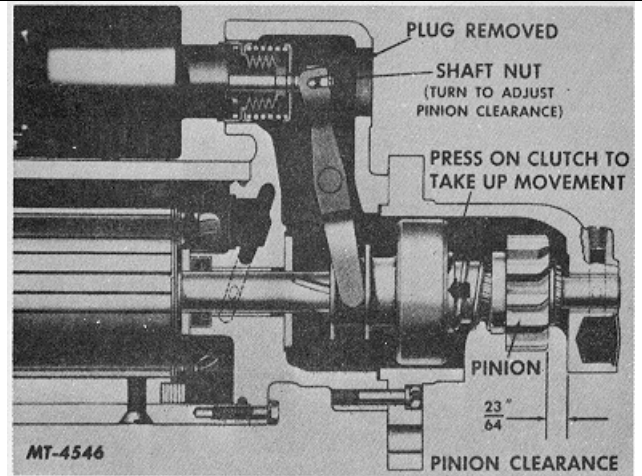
Checking Pinion Clearance on Motors with the Heavy Duty Sprag Clutch
